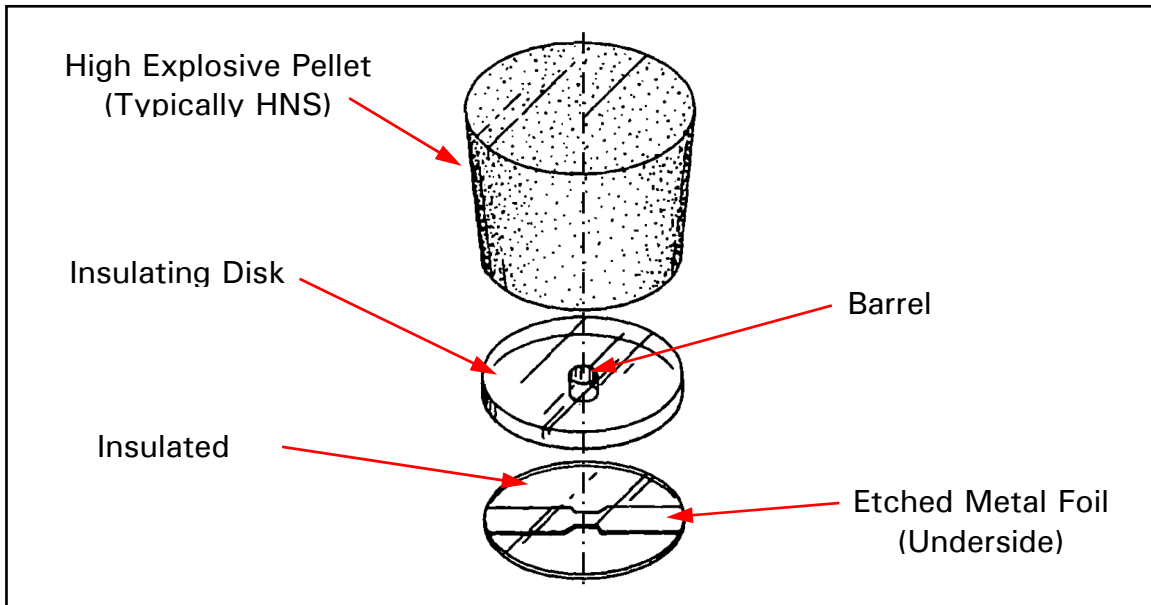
Major components used in an Exploding Foil Initiator [1].
